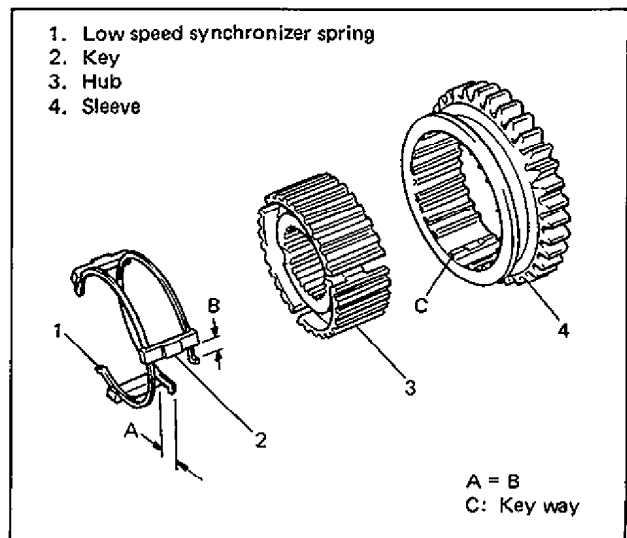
A-63 Assembling Low Speed Sleeve & Hub
